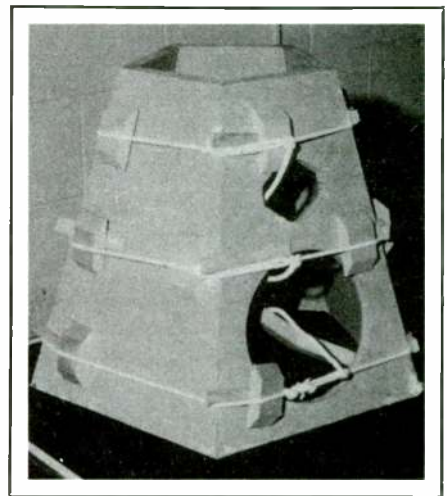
Rope and block technique to apply pressure for final assembly.
